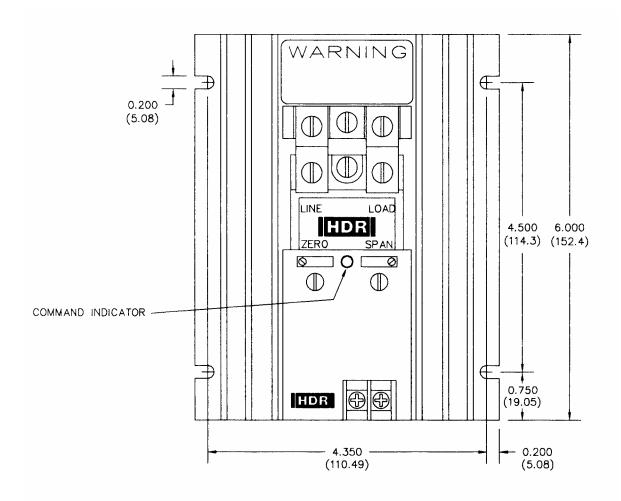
OUTLINE and MOUNTING DIMENSIONS ZF1 – 70A
